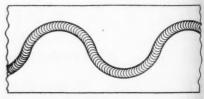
Depositing weld metal in curved lines will help to reduce strains.
